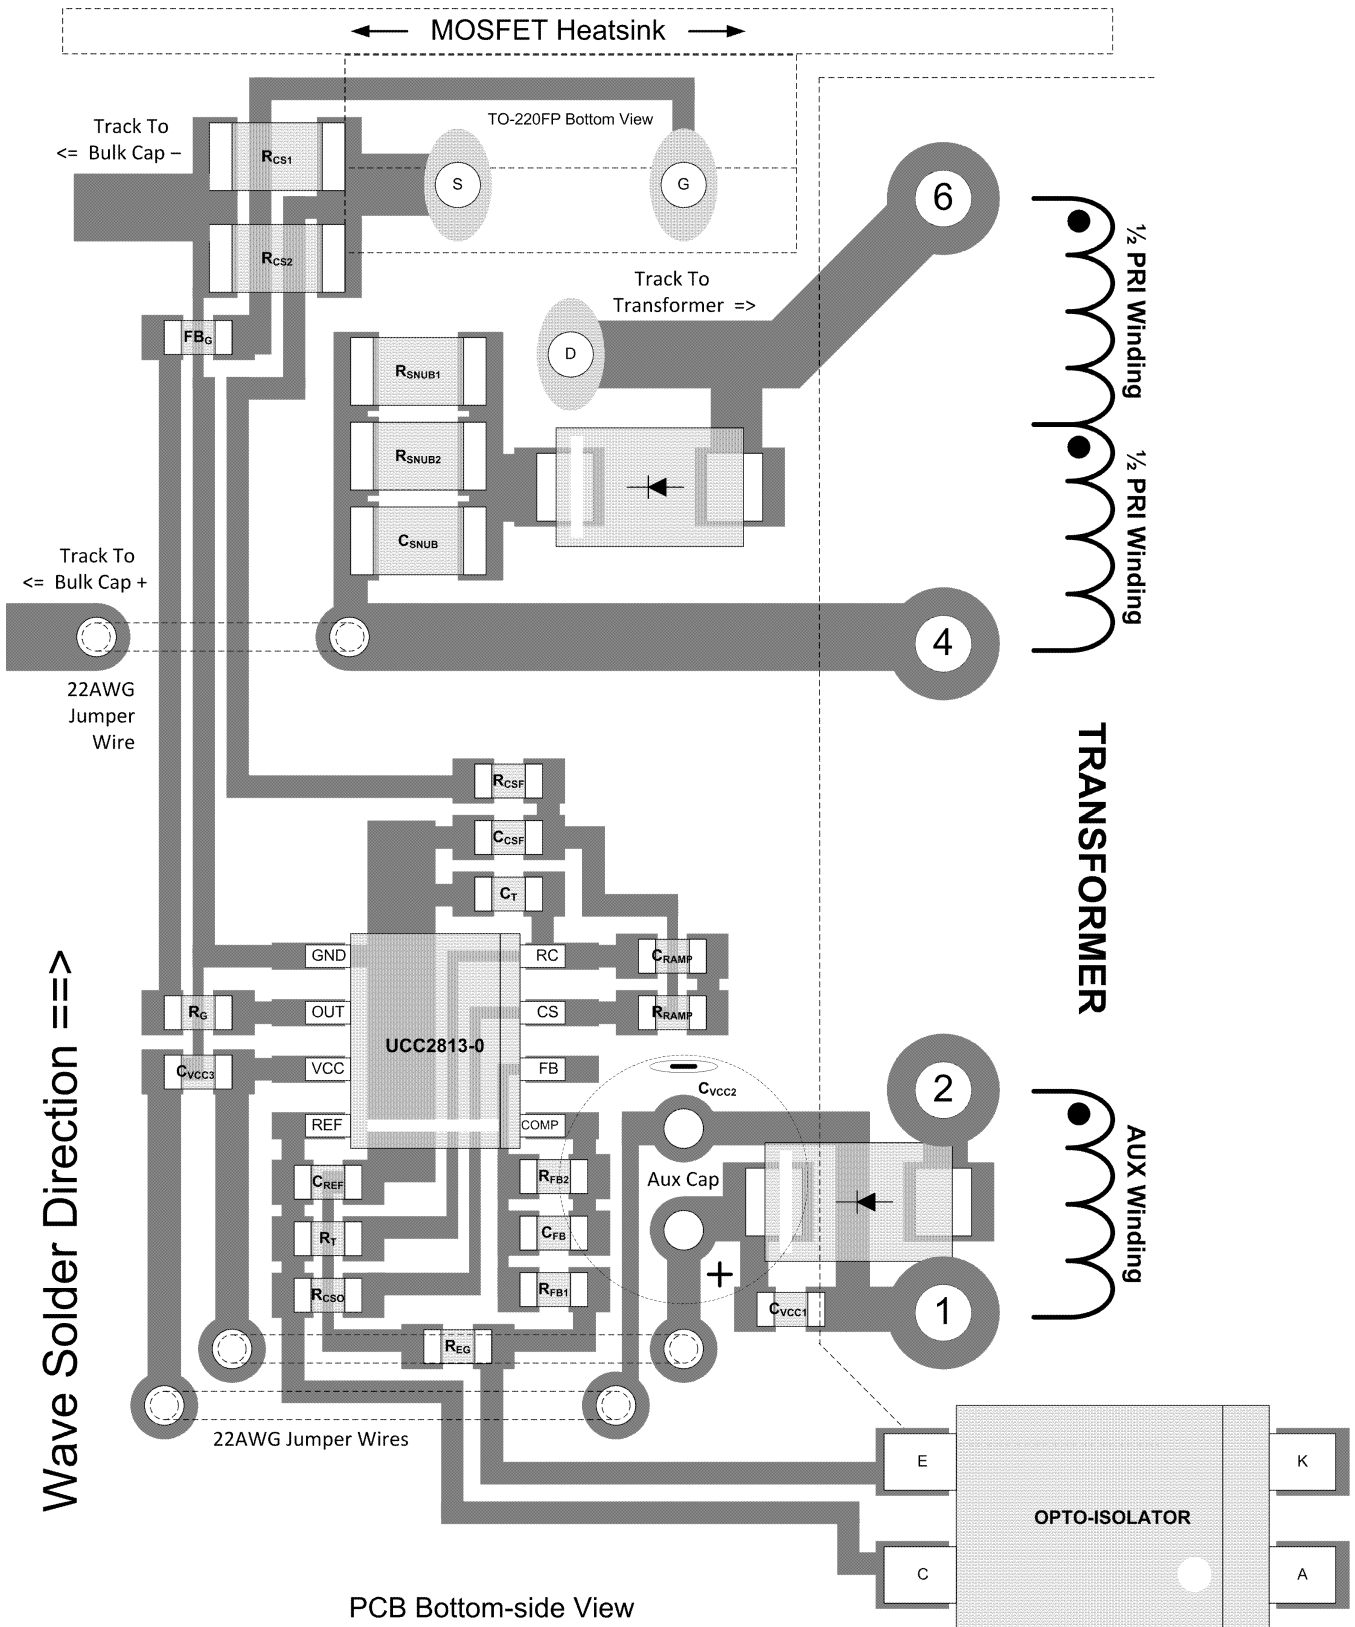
UCC2813-0 Layout Example for Single-Layer PCB
